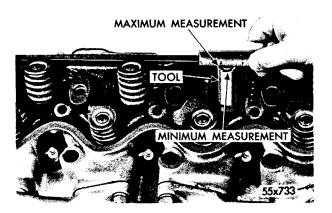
Checking Valve Stem Position (Single Rocker Engine)
